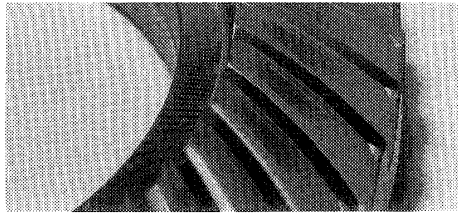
Real tooth bearing on gear tooth surface of concave side
